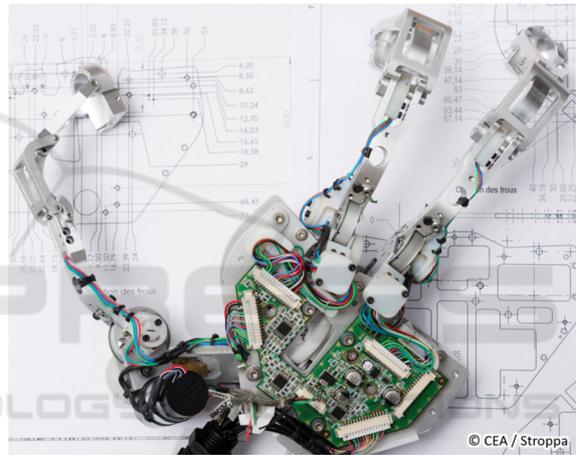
Internal view of the manufactured prototype of tri-digital dexterous hand master.
